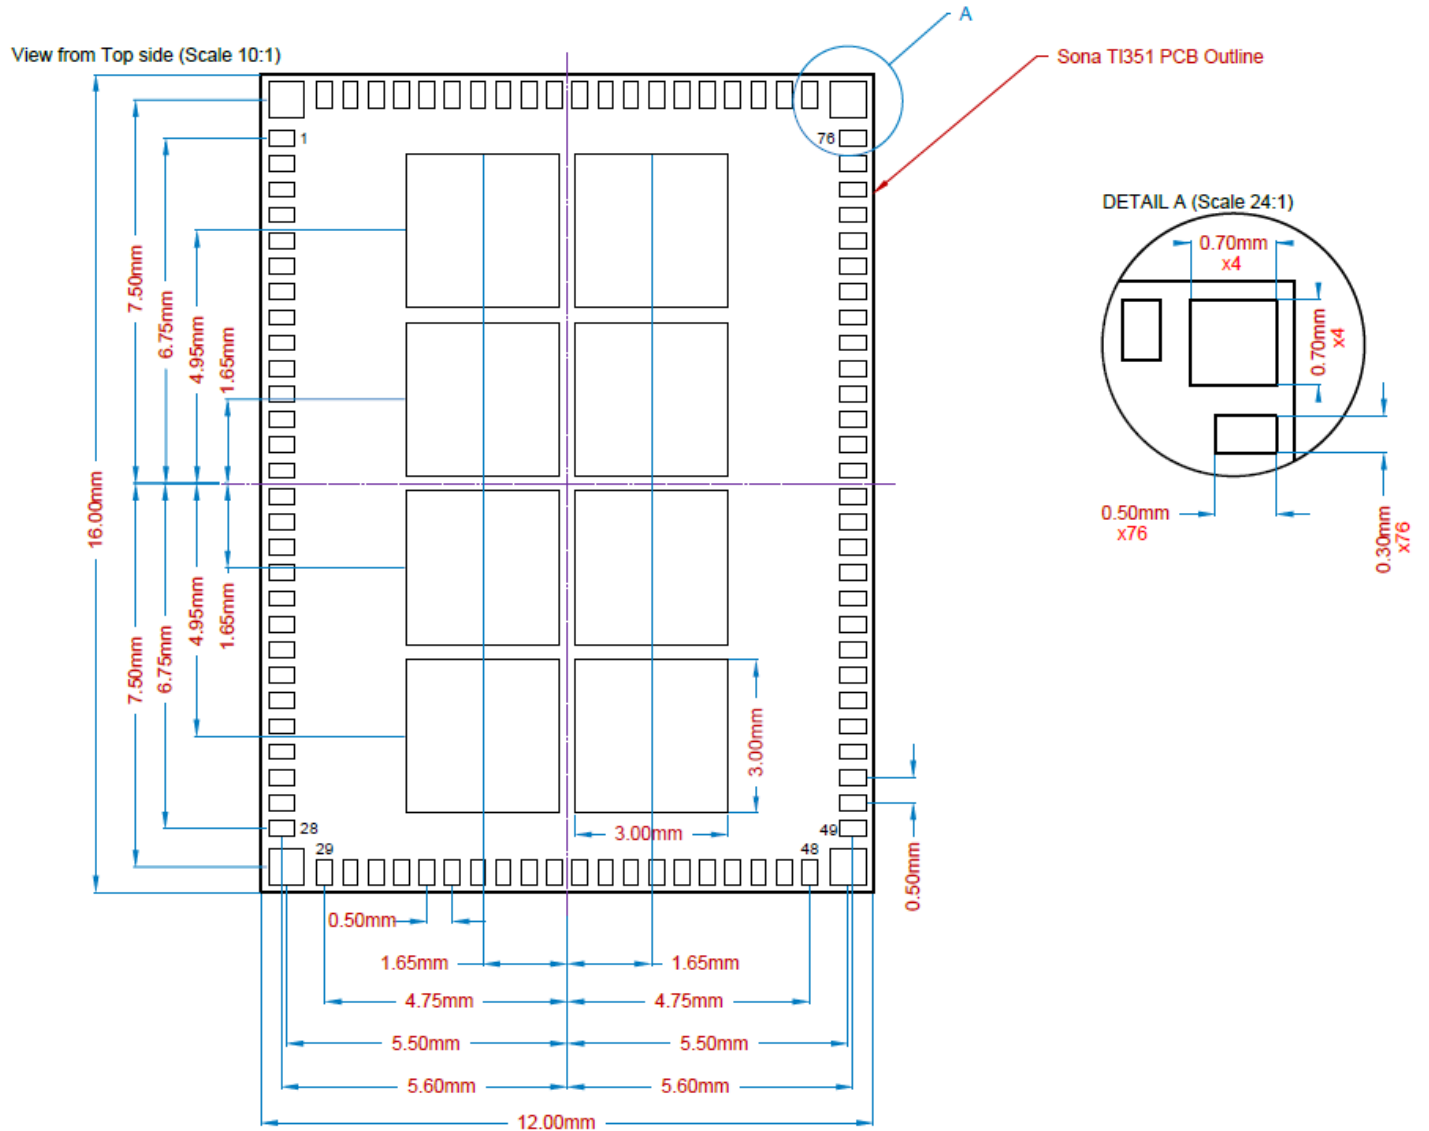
M.2 1216 PCB footprint (Top view) – TI351 MHF4 Module (453-00199)
